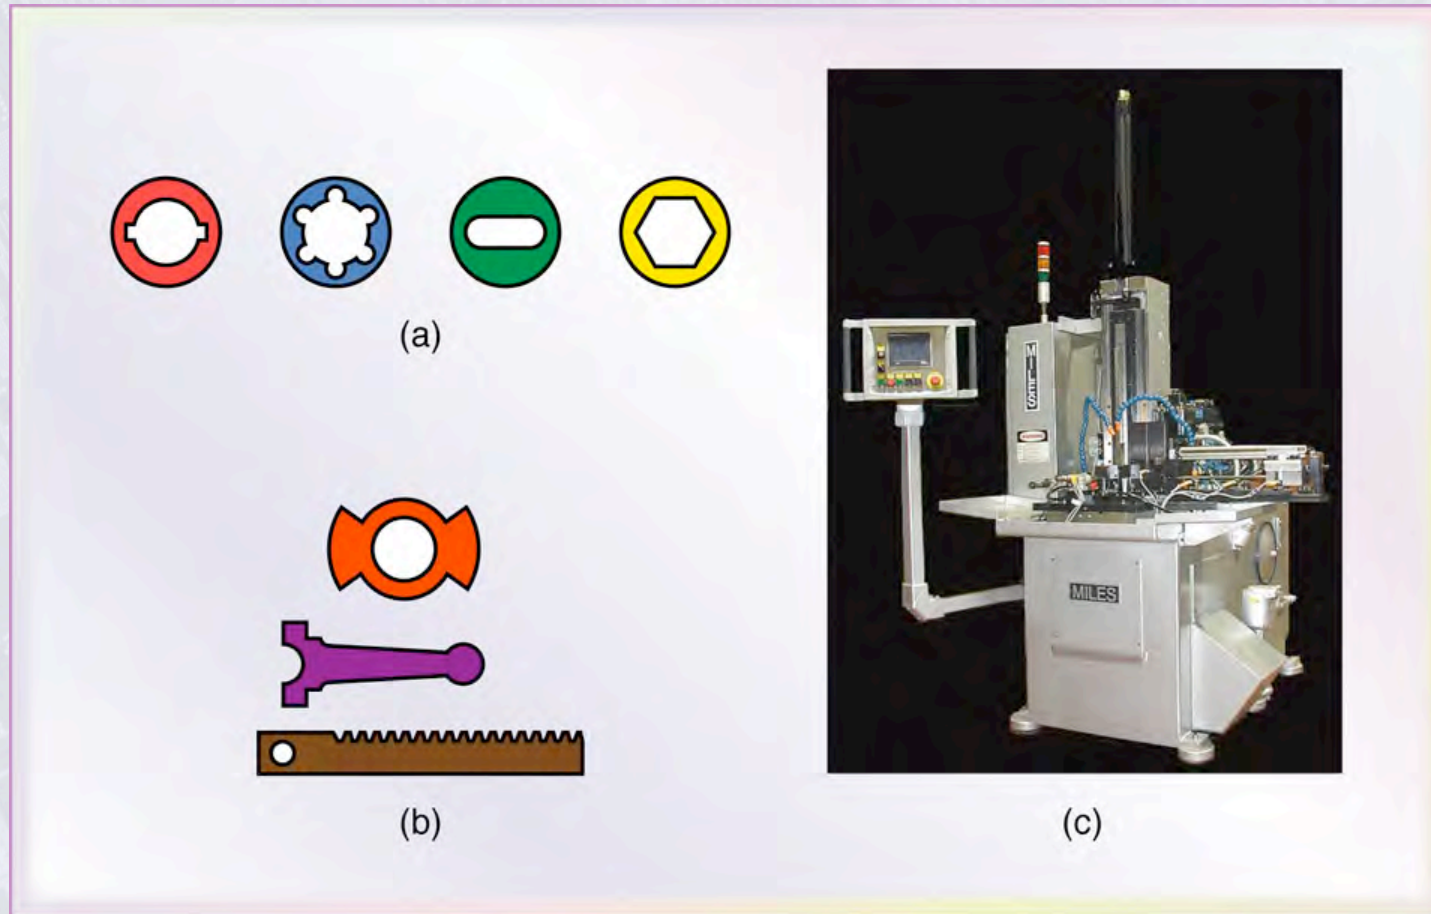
(a) Typical parts made by internal broaching. (b) Parts made by surface broaching. Heavy lines indicate broached surfaces. (c) Vertical broaching machine. *Source:* (a) and (b) Courtesy of General Broach and Engineering Company. (c) Courtesy of Ty Miles, Inc.
